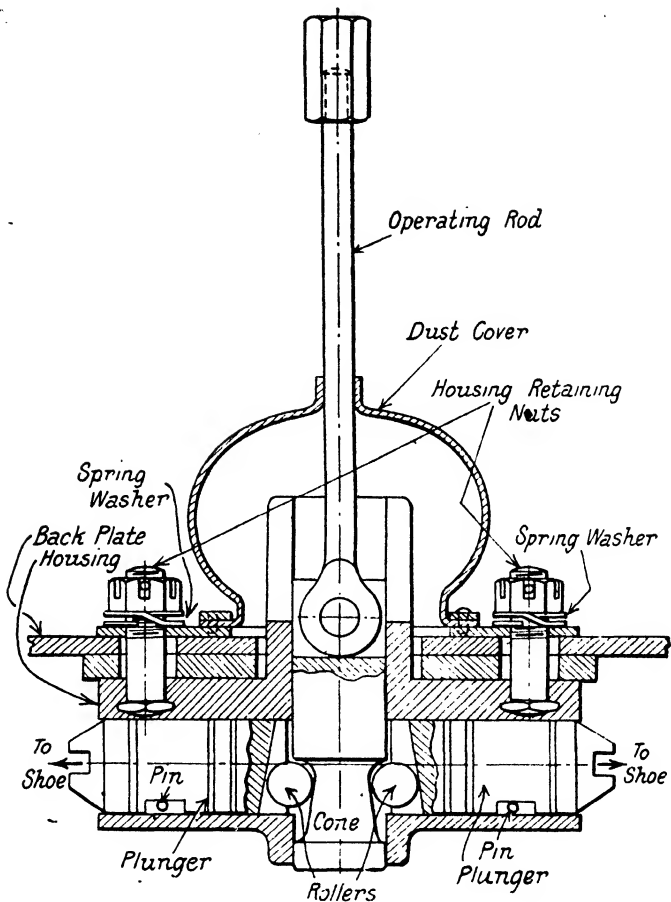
A DETAILED VIEW, IN SECTION, OF THE GIRLING EXPANDER, WHICH CONSISTS OF A CONE, ROLLERS AND PLUNGERS OF HARDENED STEEL
